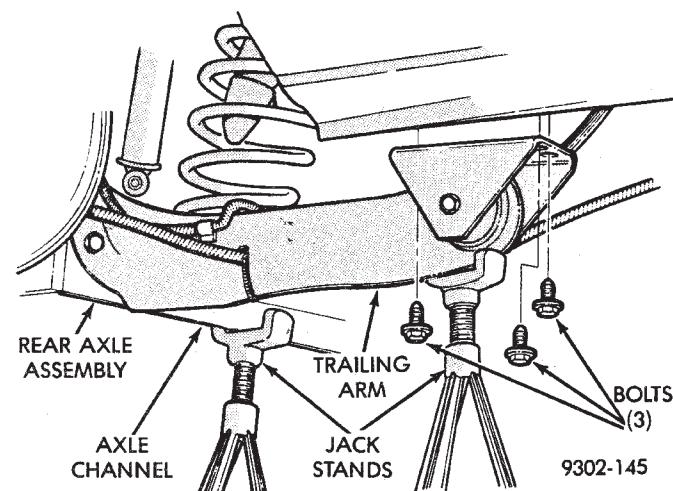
Remove/Install Coil Spring and Isolator Assembly
